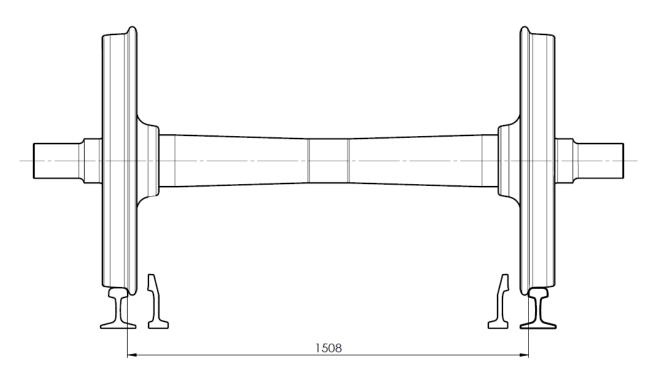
Wider gauge wheel-set on 1508 mm gauge track
